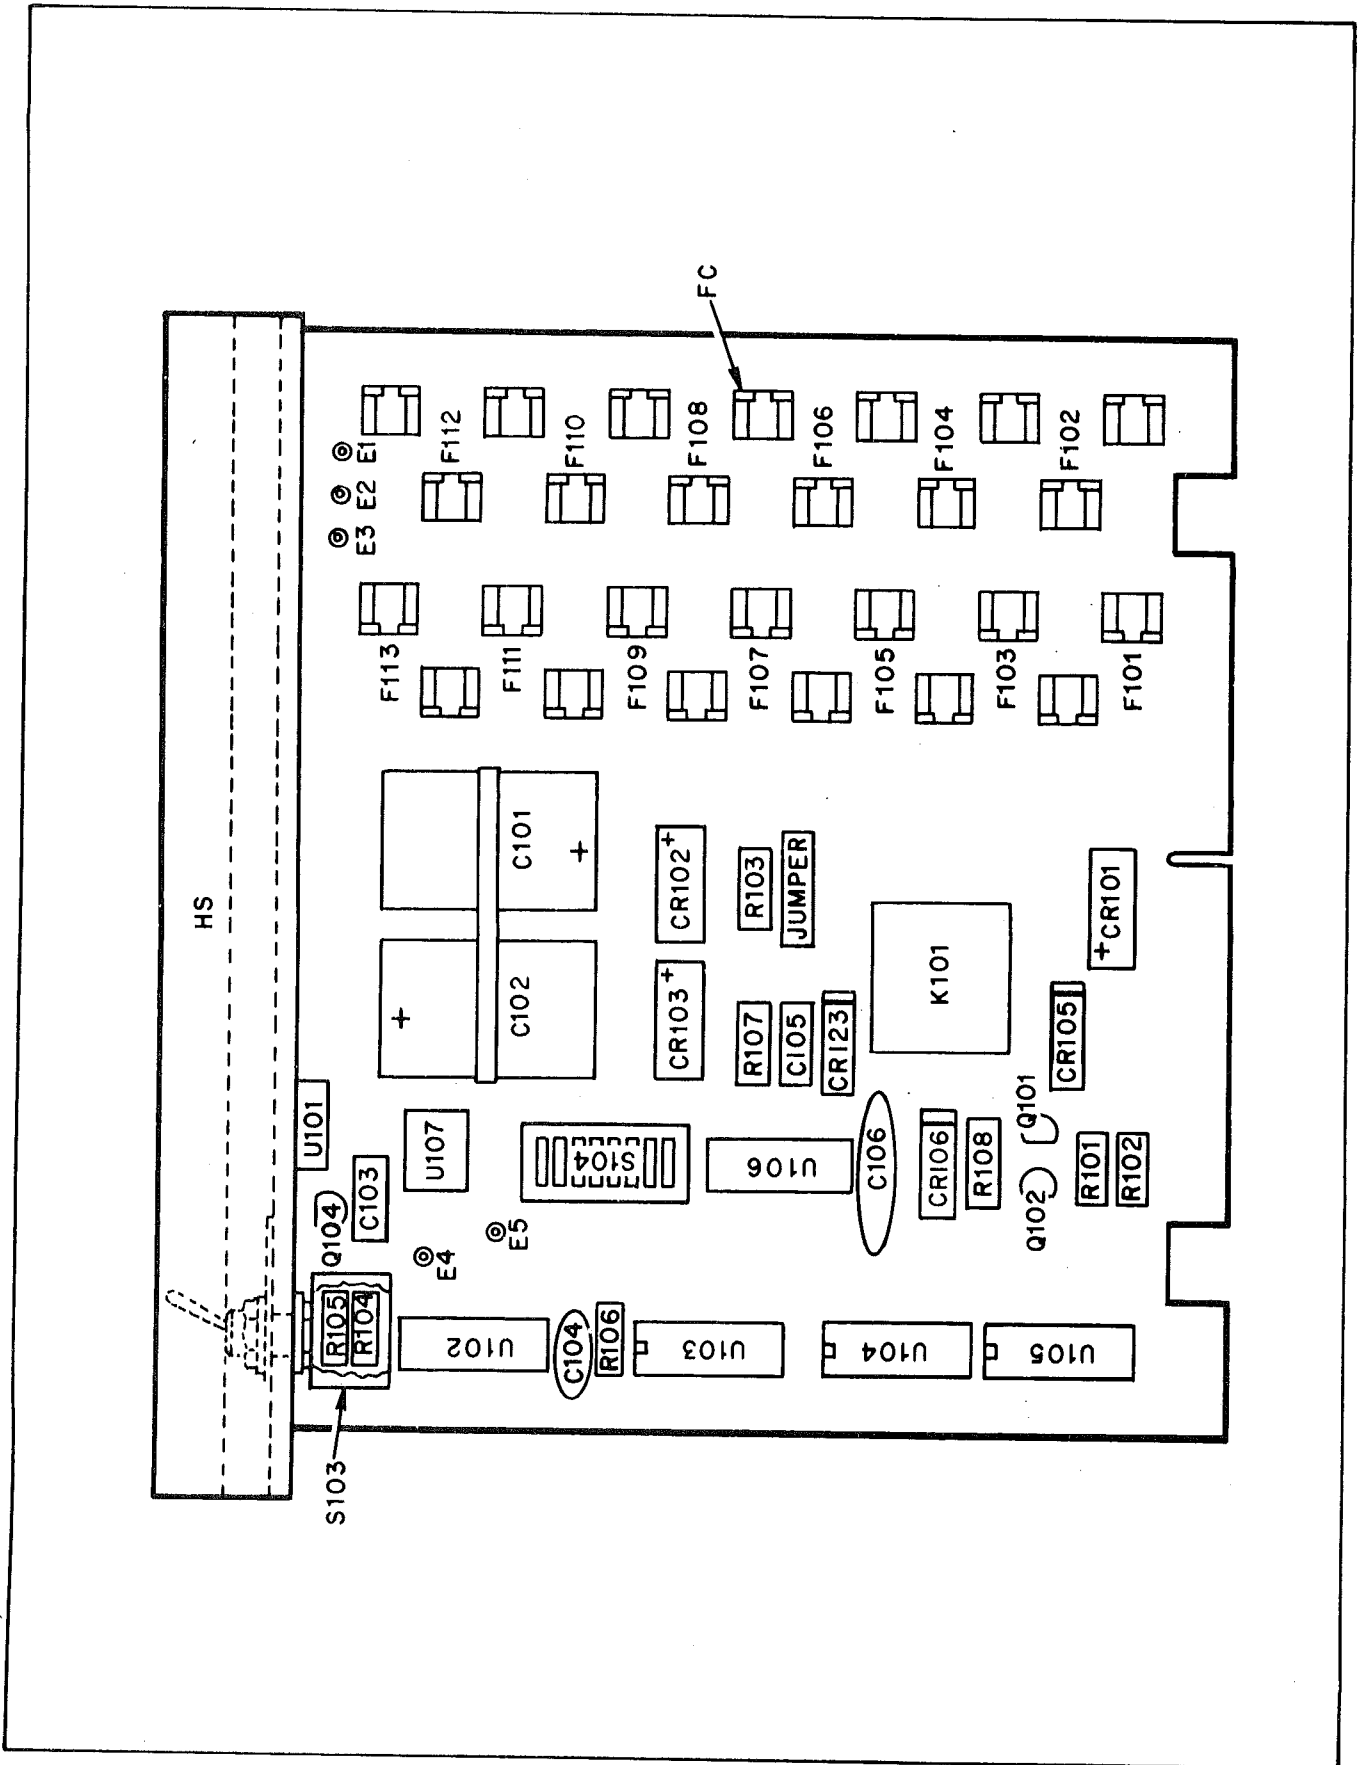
CONTROL TIMER BOARD ASSEMBLY
